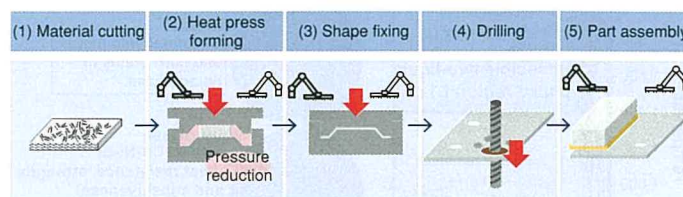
Assembly Process of CFRP Rear Hatch Inner
